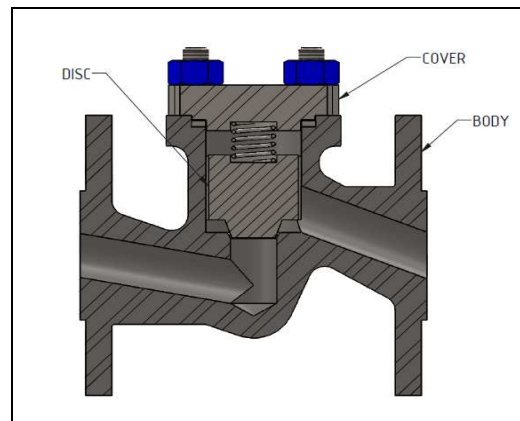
Piston Check Valve Nomenclature (DN25, CL150)
